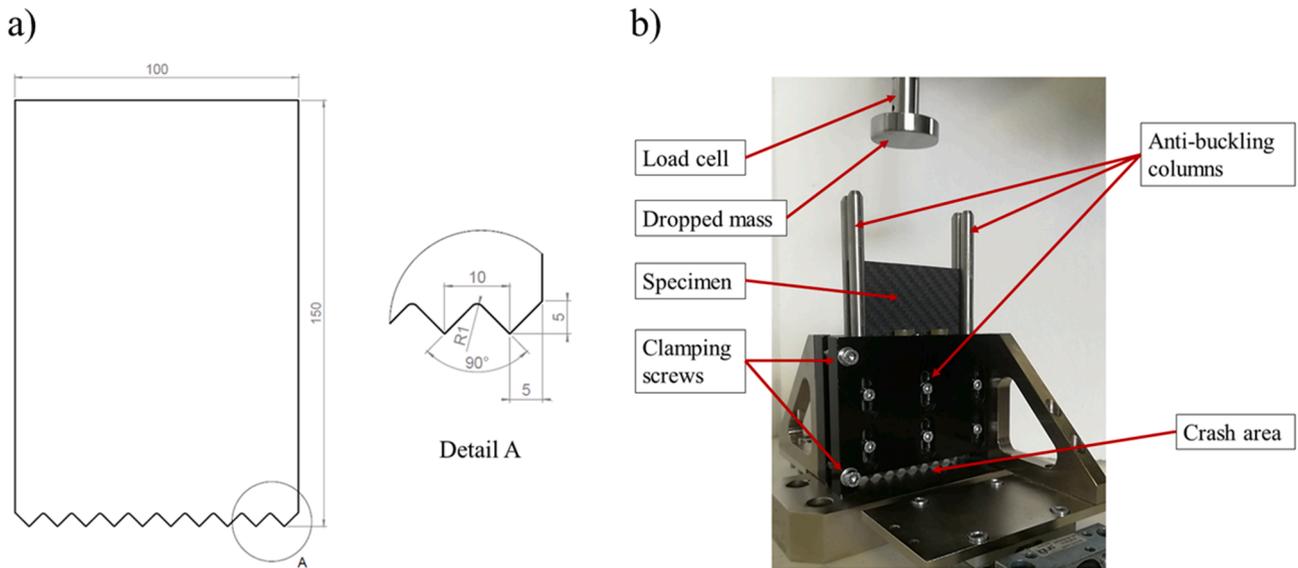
a) Geometry of the carbon fiber/epoxy specimens used for this research, with dimensions in mm; the plate thickness is 2.6 mm. b) Anti-buckling fixture for compression crash testing of composite flat plates in impact conditions.
